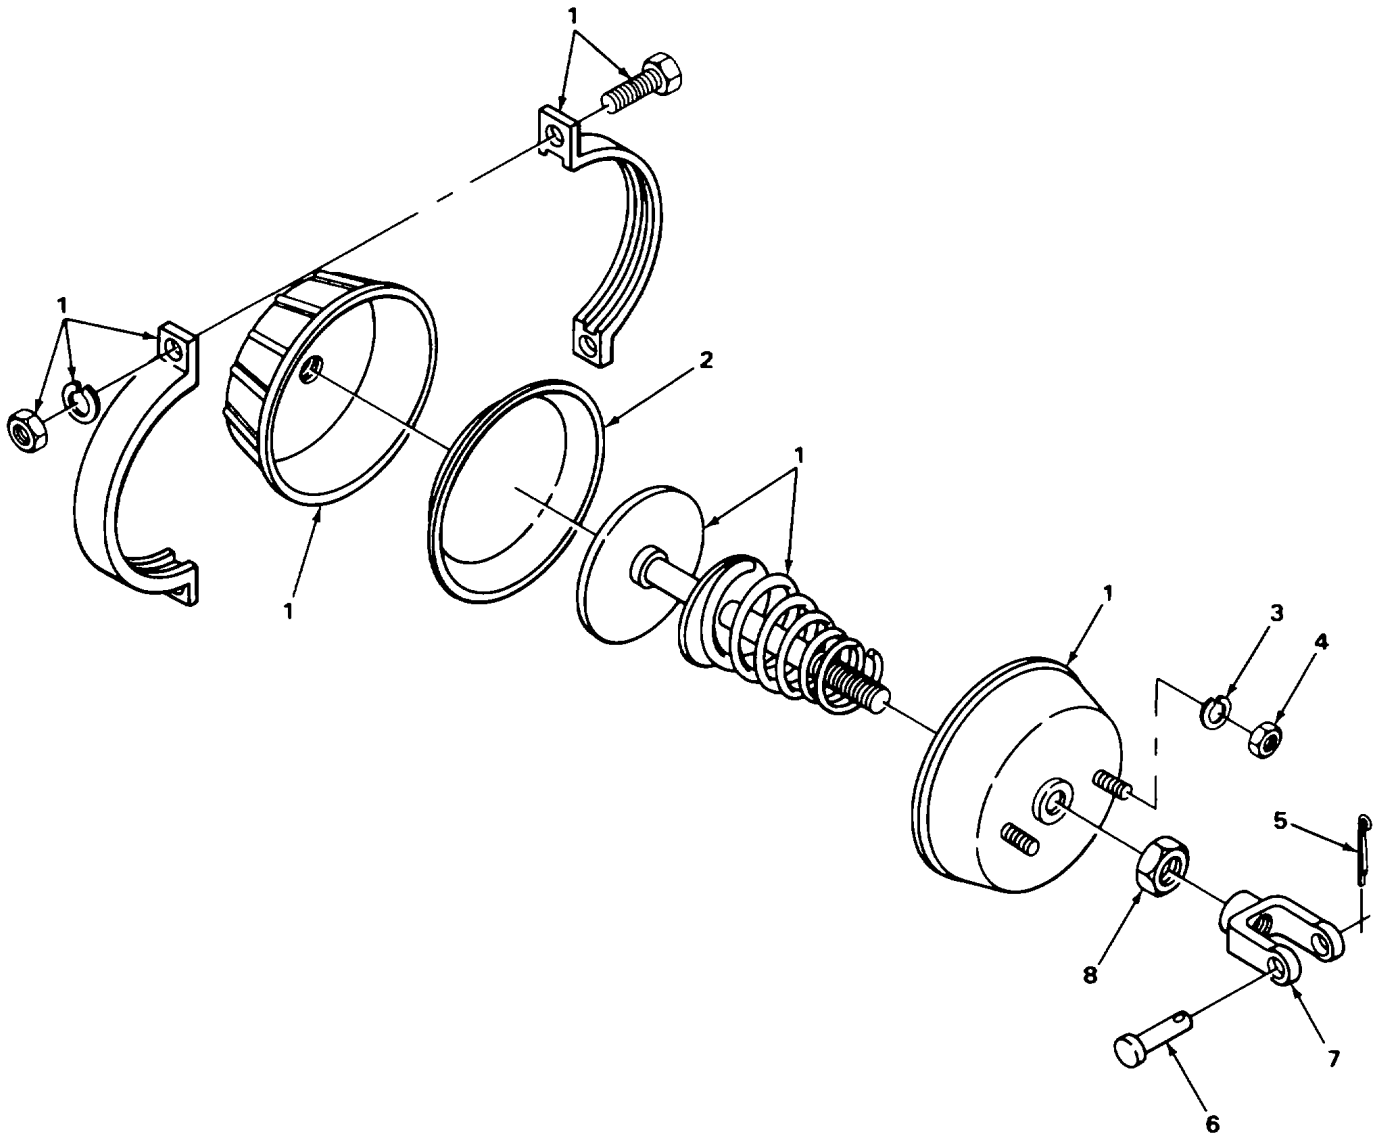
BRAKE ACTUATOR ASSEMBLY
